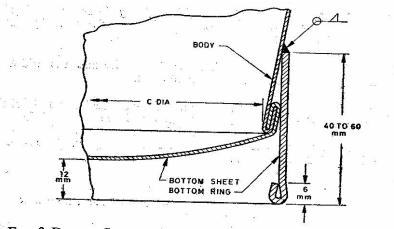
Details Showing Method of Joining Bottom to Body and Bottom Ring to Body
